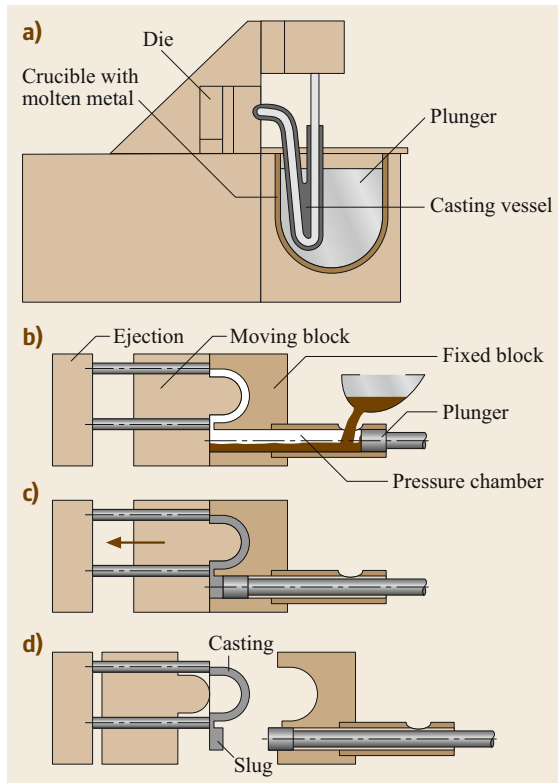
d High pressure die casting: (a) hot chamber process, (b–d) cold-chamber process, (b) filling of casting chamber, (c) plunger for molten metal into die, (d) ejection of casting [10.1, 6]
